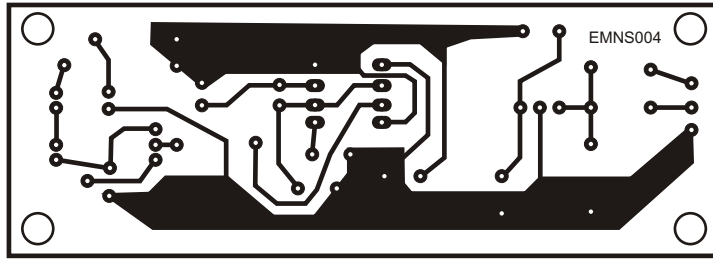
Actual - size, solder-side PCB layout for the transmitter unit.
